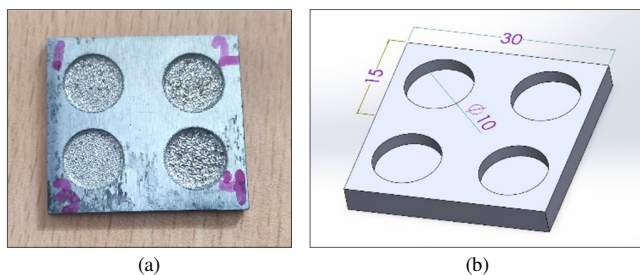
Workpiece: (a) machined sample and (b) model showing the dimensions of the sample.
